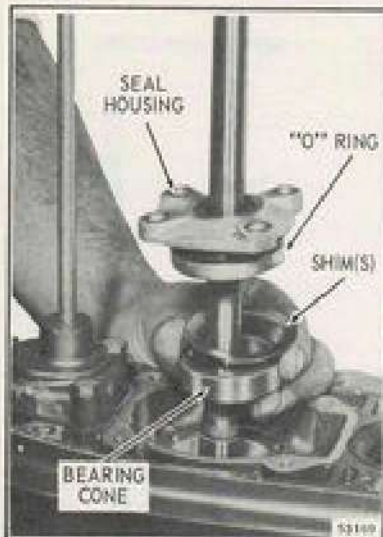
Bearing Cone, and Shim and Seal Assembly
